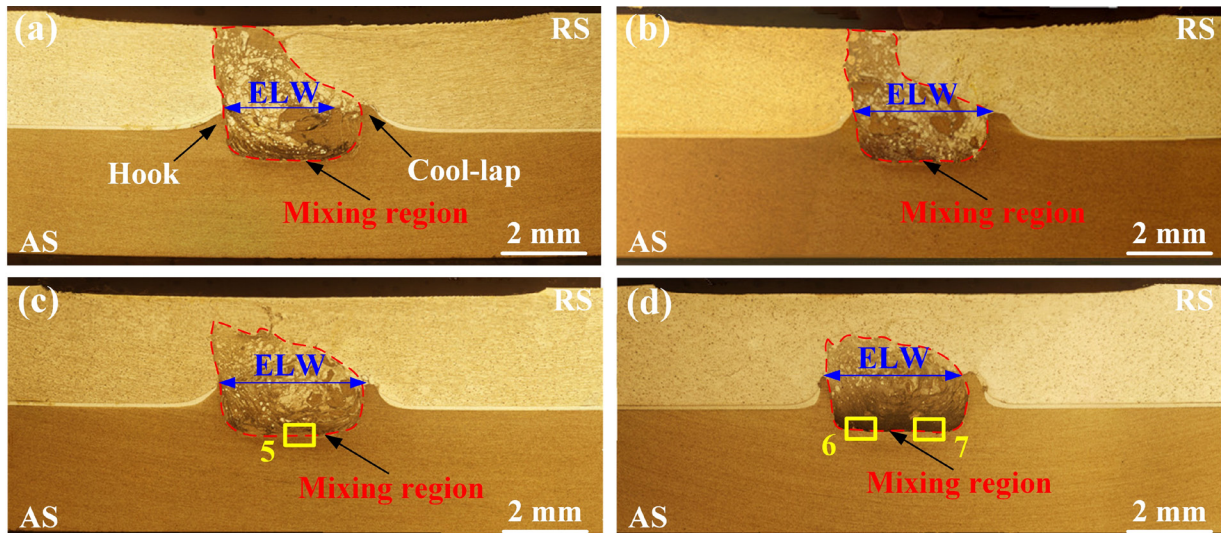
Macrostructures of dissimilar Al/Mg FSLW joints with Zn filler at different welding speeds: (a), (b), (c) and (d) 200, 150, 100 and 50 mm/min
